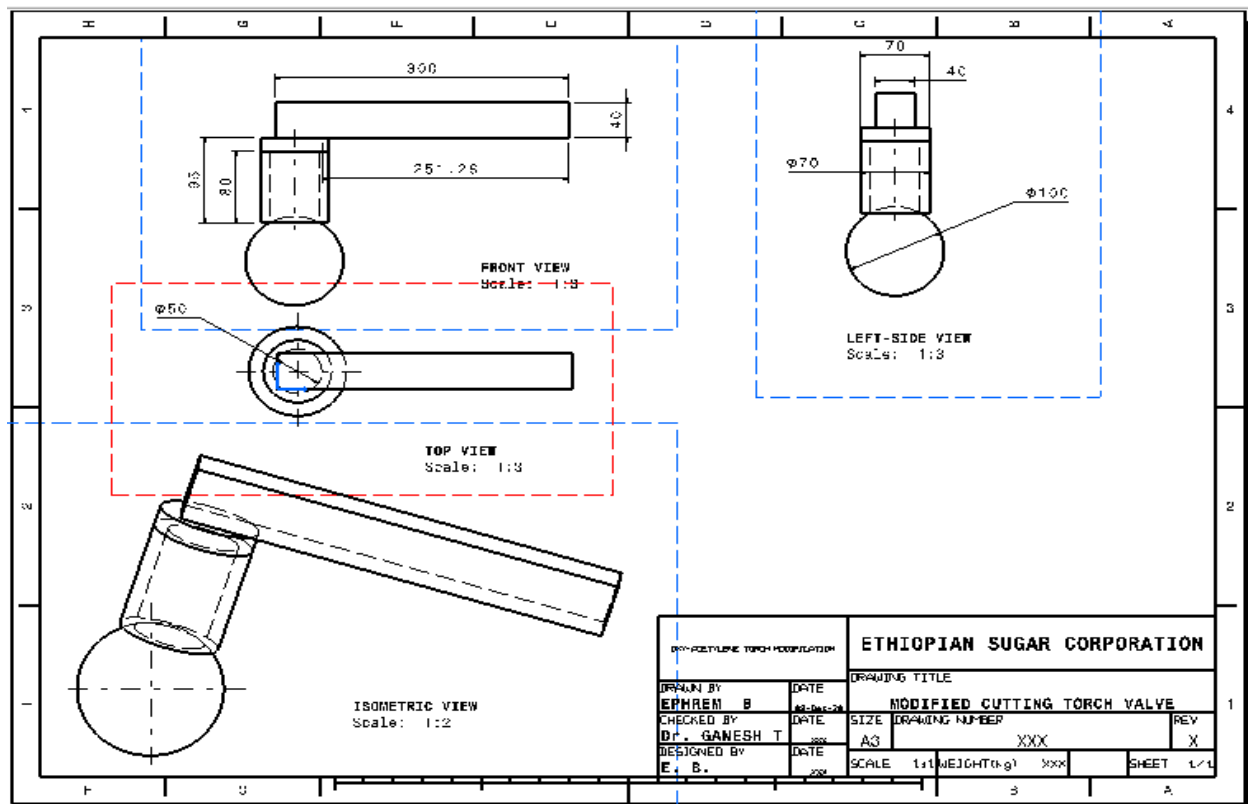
Modified oxy-acetylene cutting torch with powder supply and control valve
